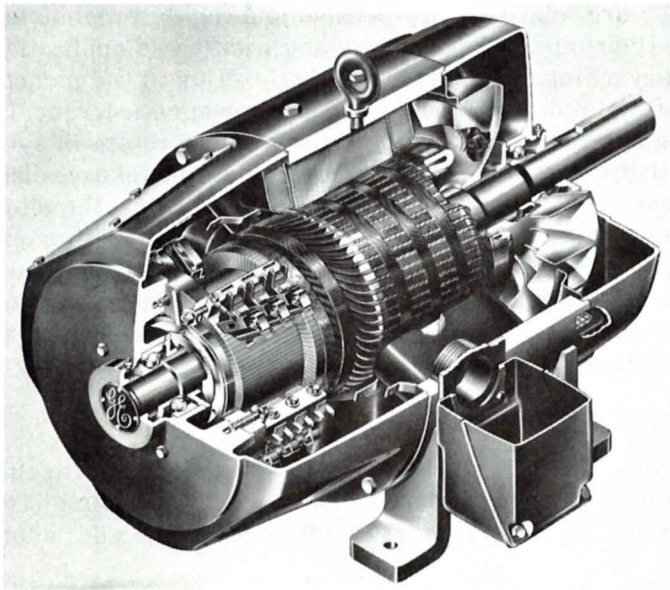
Cutaway view of a typical integral-horsepower dc motor. (General Electric Company.)
